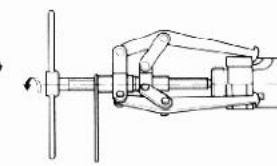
Removal of Inner Ring Using Withdrawal Tool(2)
